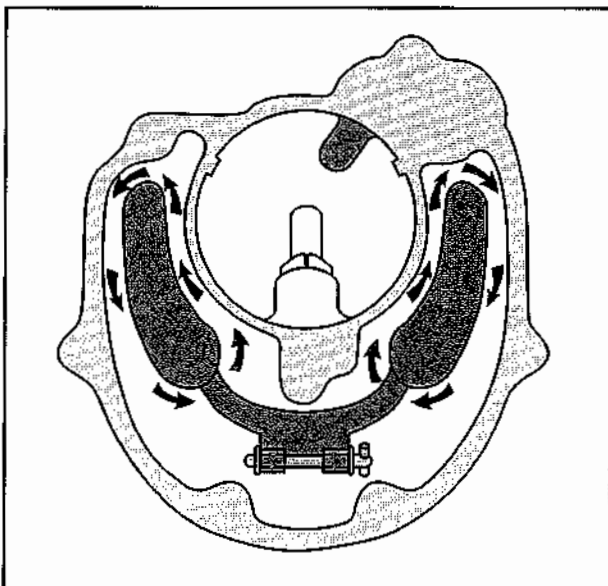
To check the side clearance between the float and float bowl, you must use a special test fixture that enables you to pass a drill rod of a specified size completely around the float.
